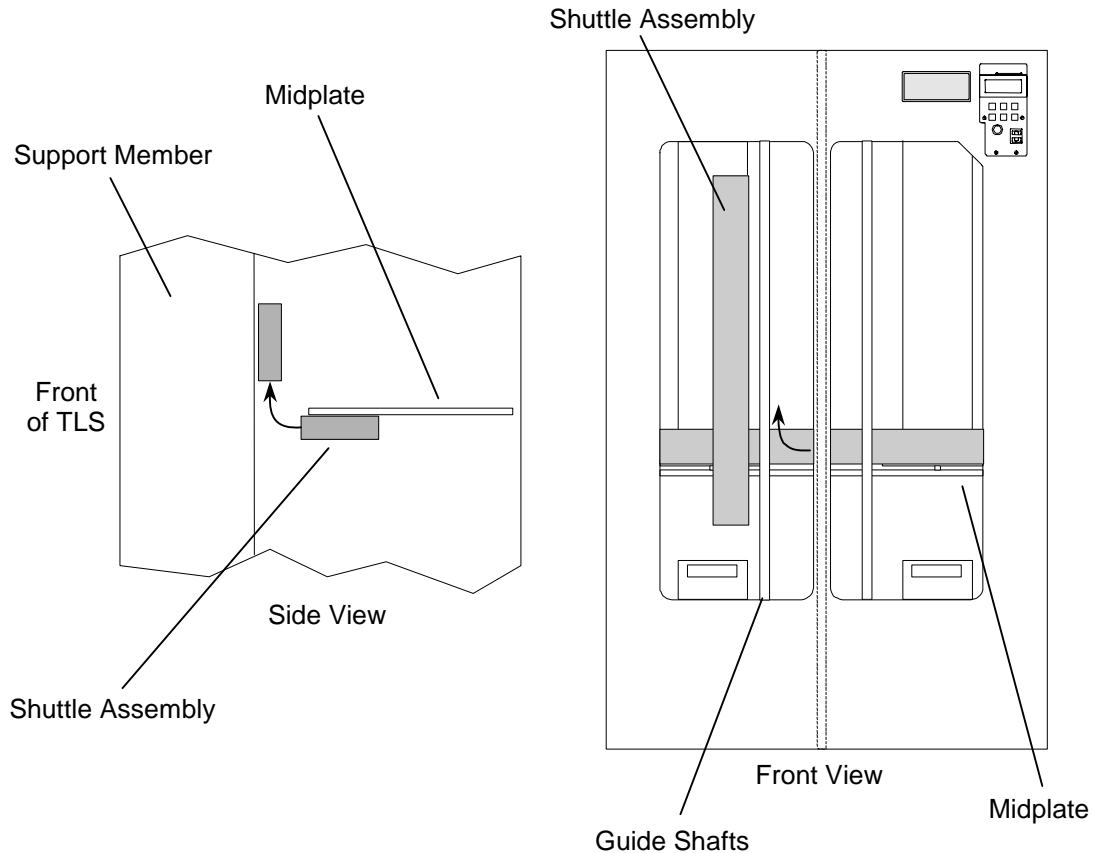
Two Views of Shuttle Assembly Removal from TLS
